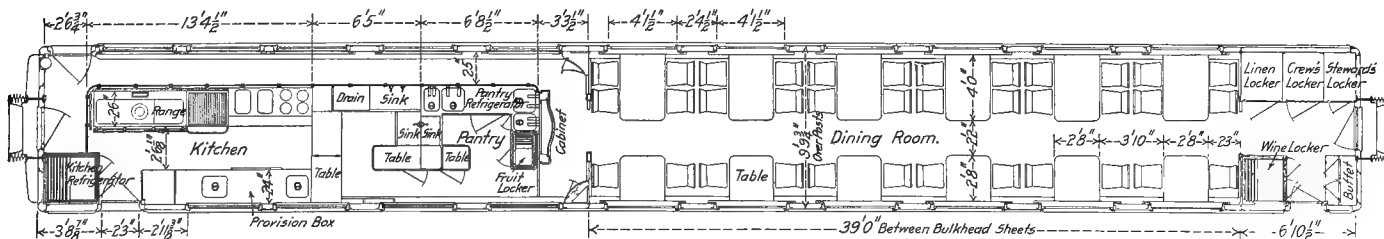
Floor Plan of Pennsylvania Lines Dining Car.
